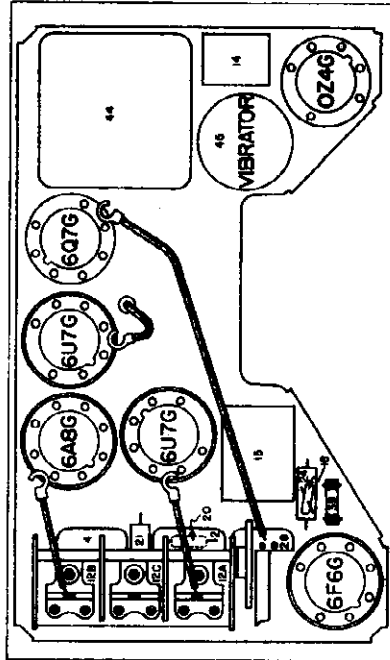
PARTS LAYOUT UNDER SUB. PANEL 982044
